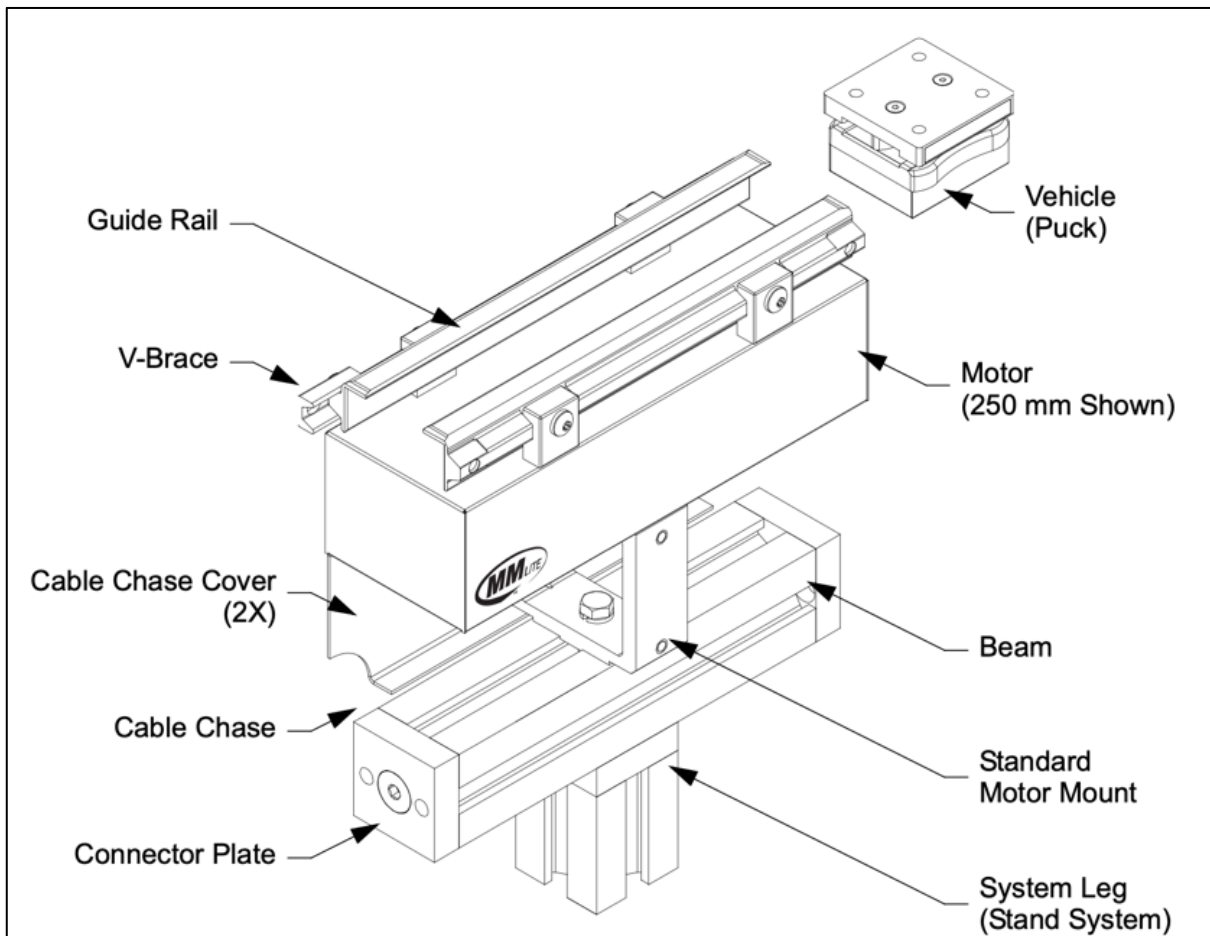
Full assembly of a 250-mm linear magnetic motor
